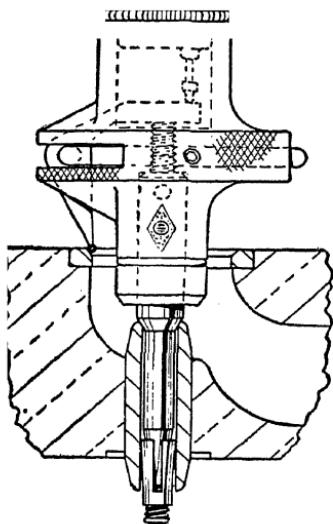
Testing Valve Seat for Run-out or Eccentricity
